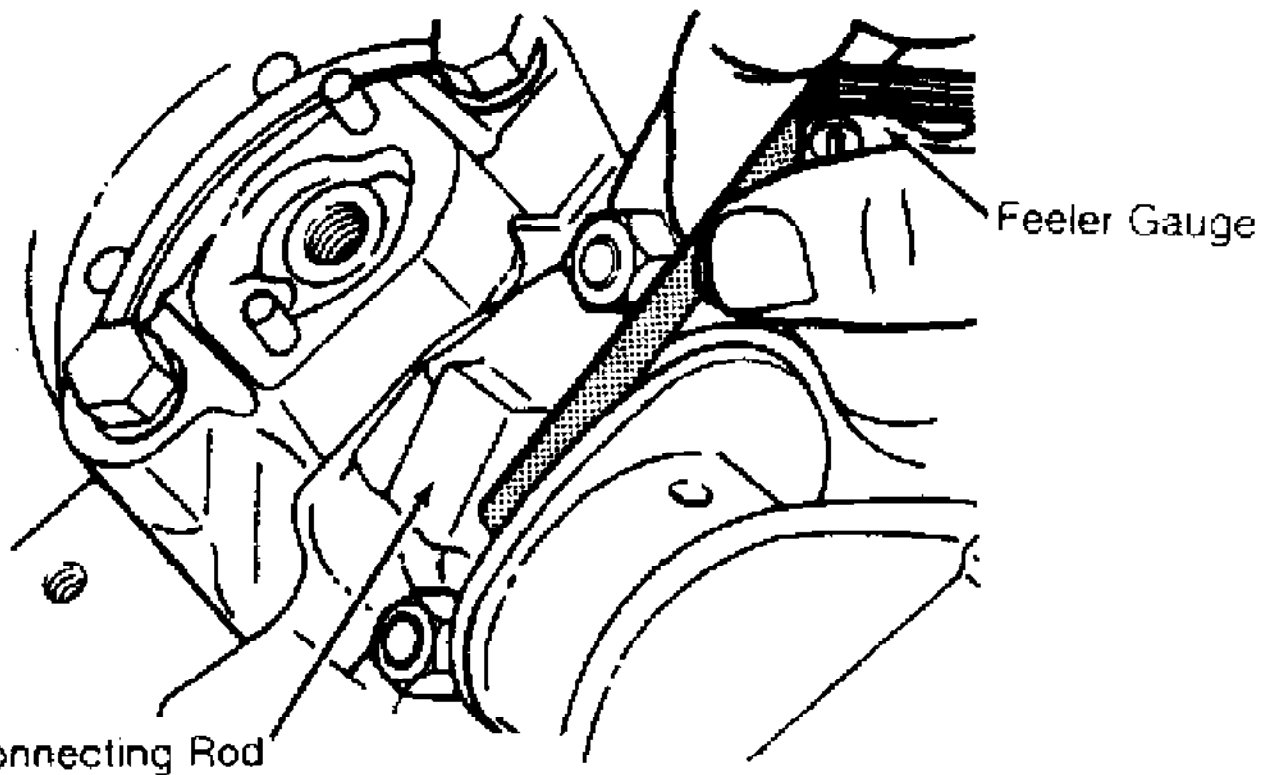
Measuring Connecting Rod Side Clearance - Typical
